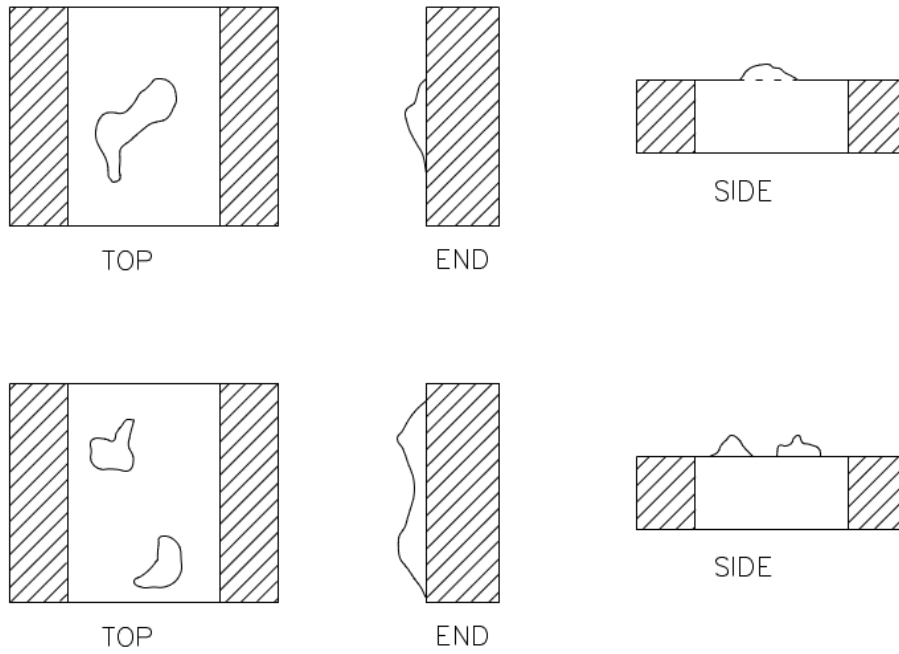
Raised surfaces, bubbles, and blisters.
